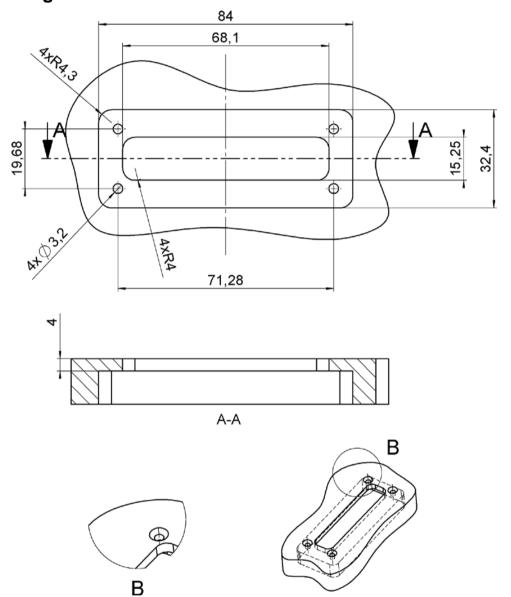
Dimensions of the vacuum feedthrough for data transmission (4668) (dimensions in mm)
